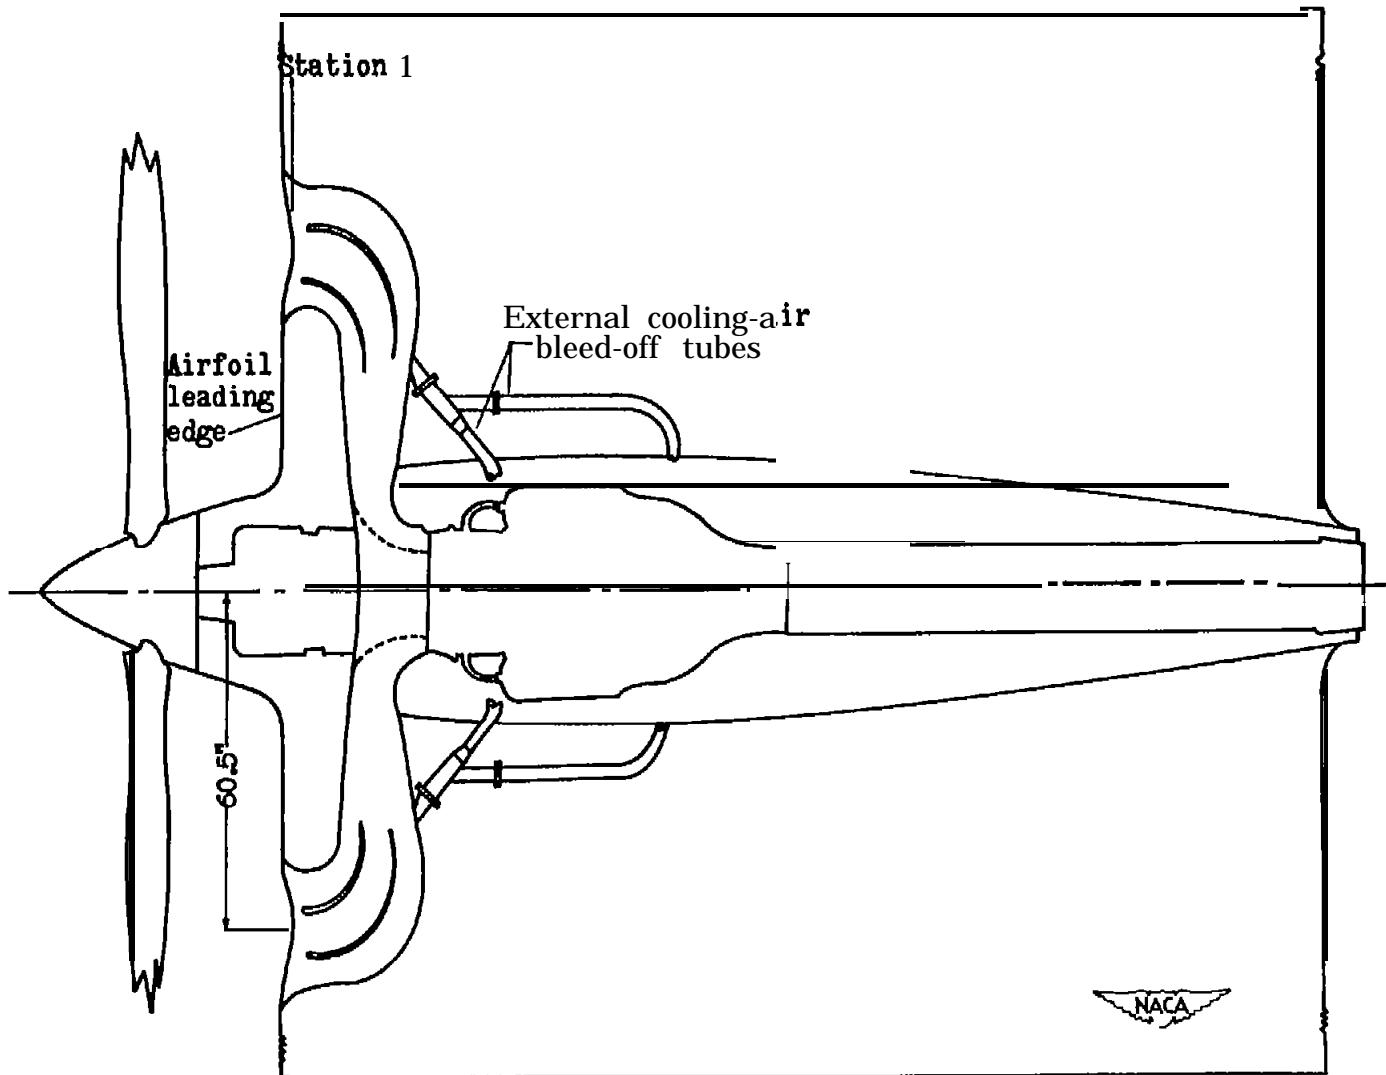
Sketch of axial-flow gas turbine-propeller engine Installation showing location of wing ducts and inlets.
